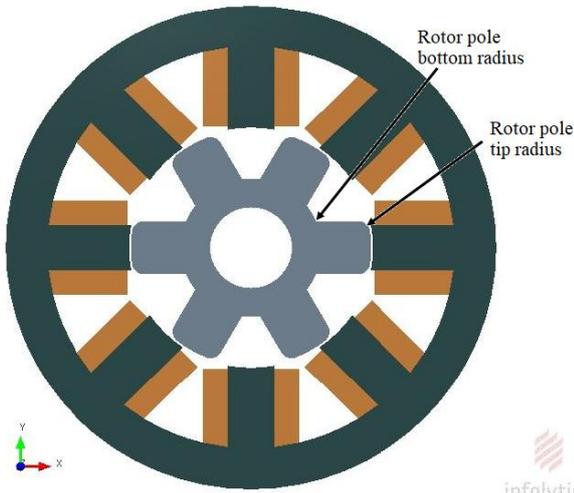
Improved design of 8/6 SRM with rotor pole tip radius = 5 mm
